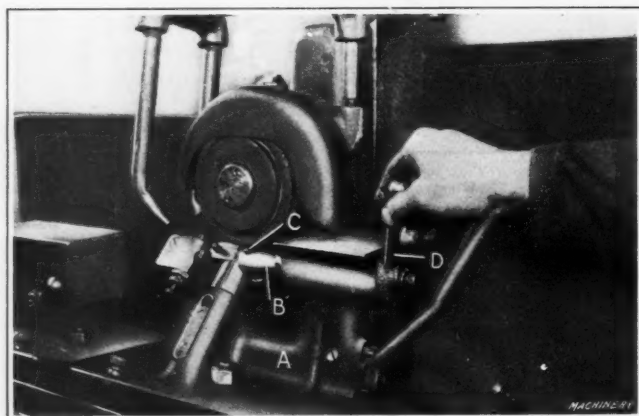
Device for truing Face and Sides of Grinding Wheel for Keyshaft Grinding on Bath Machine—Device set for truing Radius
